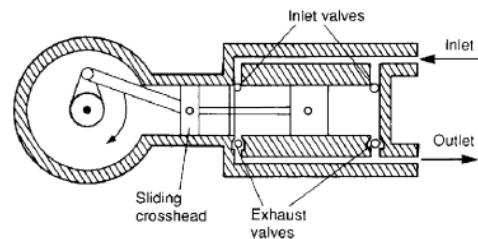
Double-acting piston actuator [65]. The air enters via the inlet. If the inlet valves are opened, the sliding cross-head will move to the left. If the exhaust valves are opened, the air escapes through the outlet.
